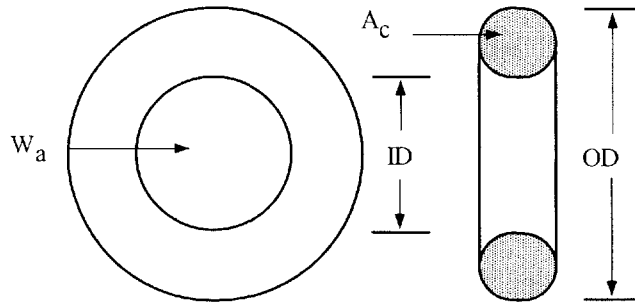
Dimension Outline for Toroidal Ferrite Cores.
